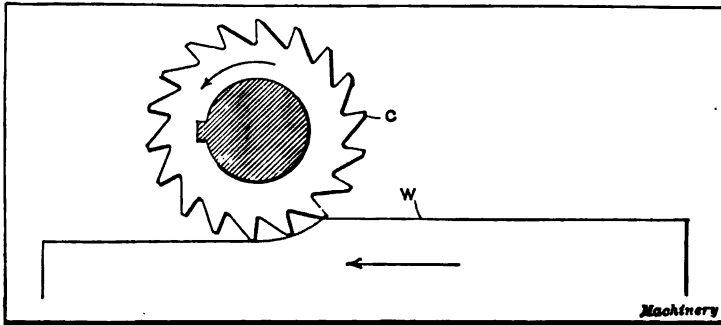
End View of Cylindrical Cutter Milling Flat Surface
